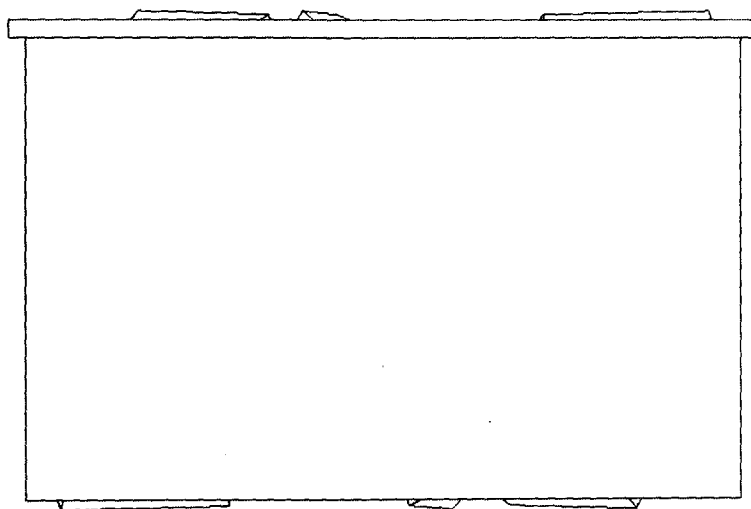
Shows the front view of the solid CAD model of the Helical blade Swirler device
